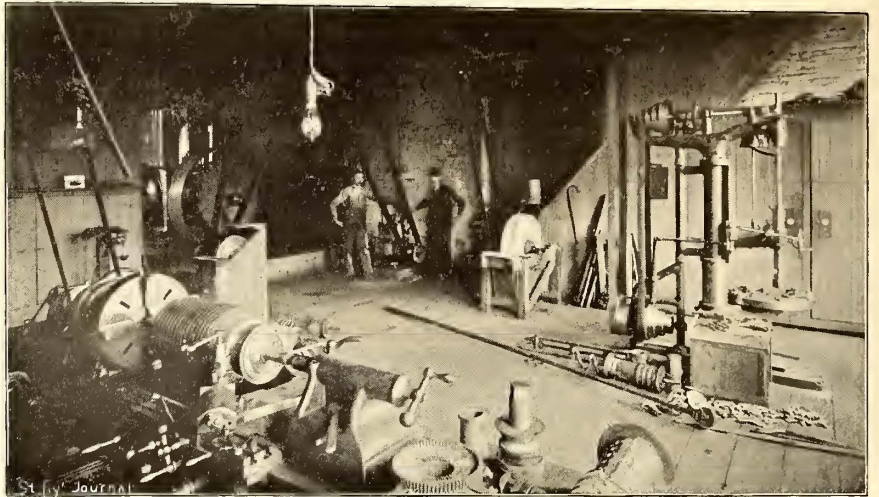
REPAIR SHOP—TERRE HAUTE STREET RAILWAY CO.
